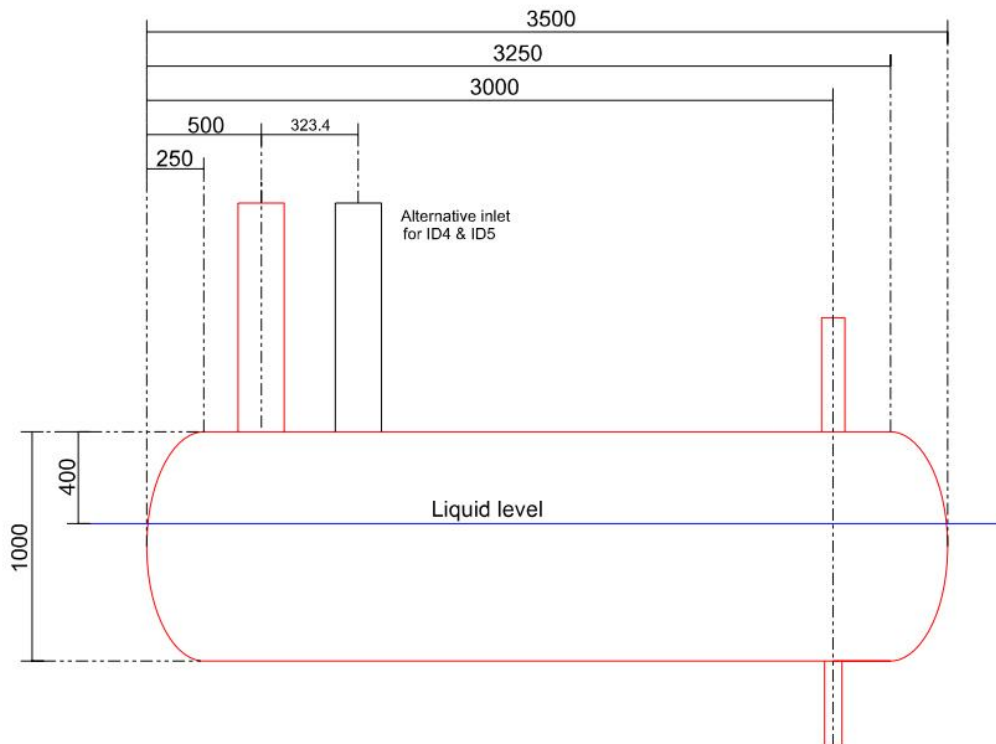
The dimensions of modelled horizontal container, side view. Measures are in millimeters.
